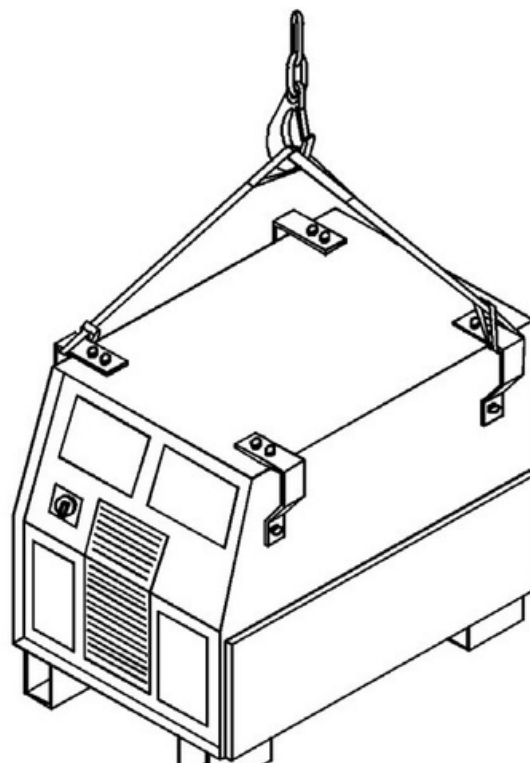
Proper Hoisting Technique of a Nelweld Power Supply Using Two Handles
